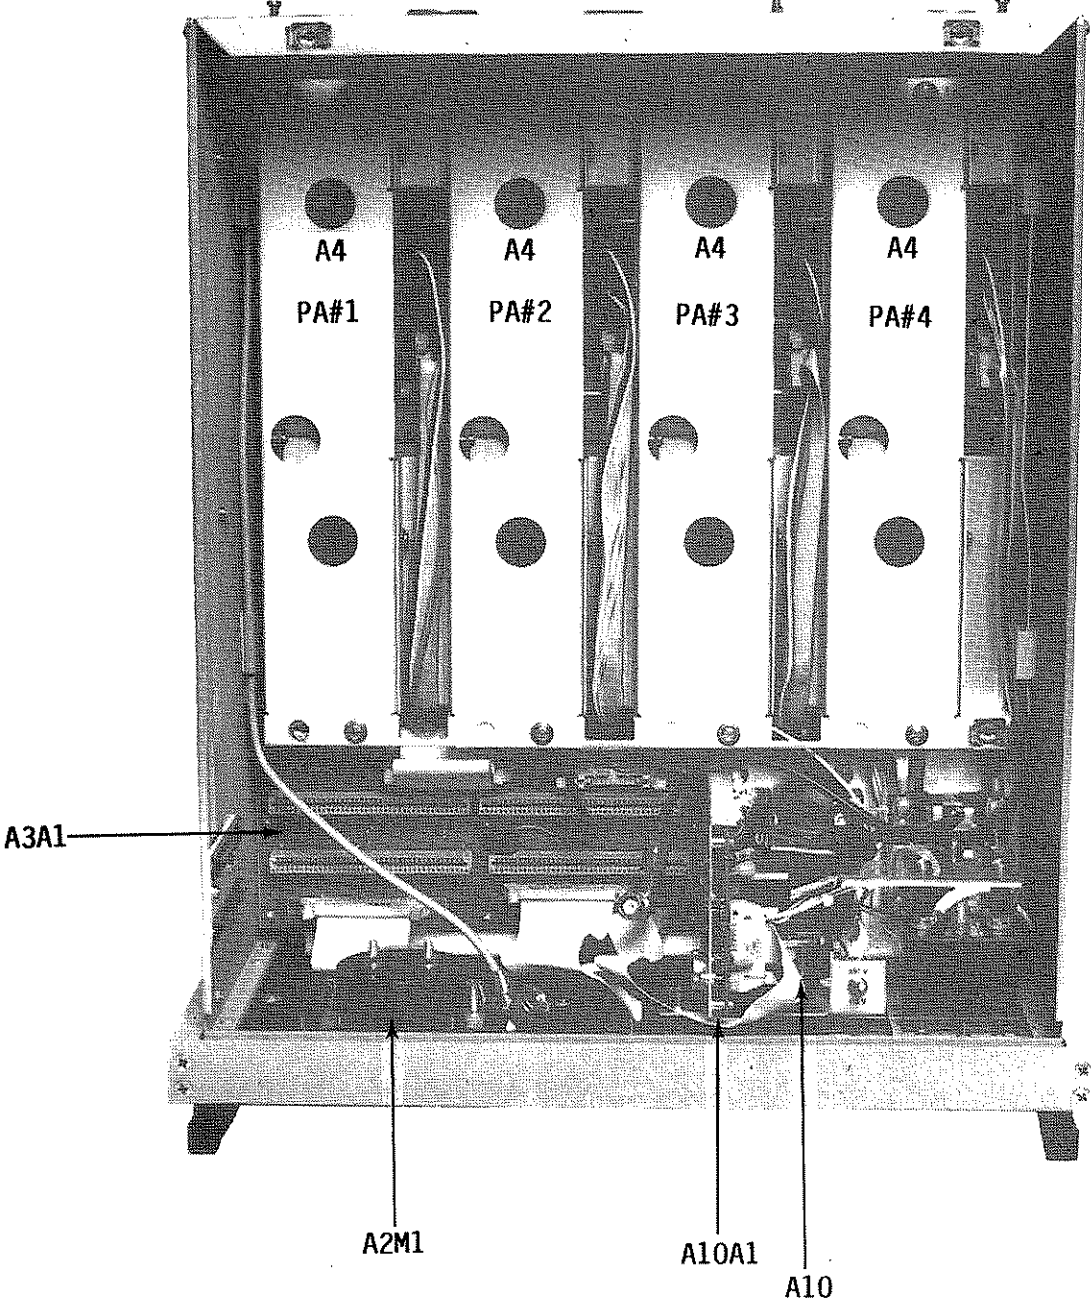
MAJOR ASSEMBLY LOCATIONS
